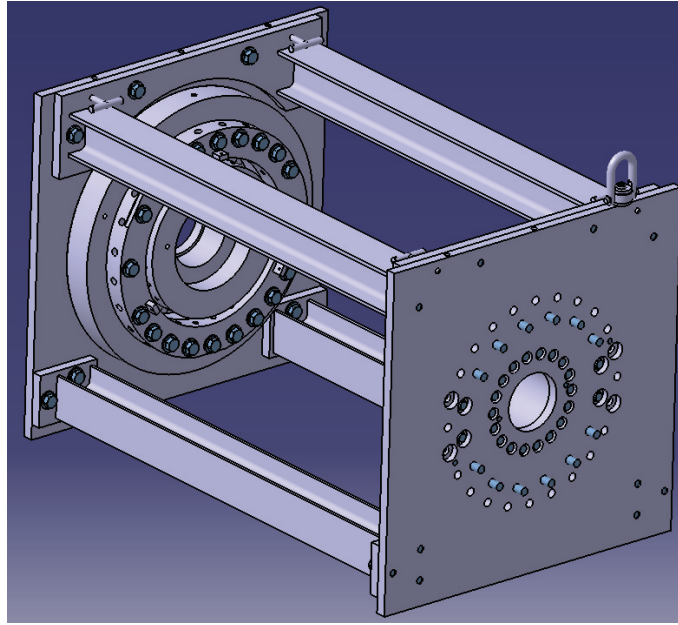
Inner and outer rings showing radial bolt holes
